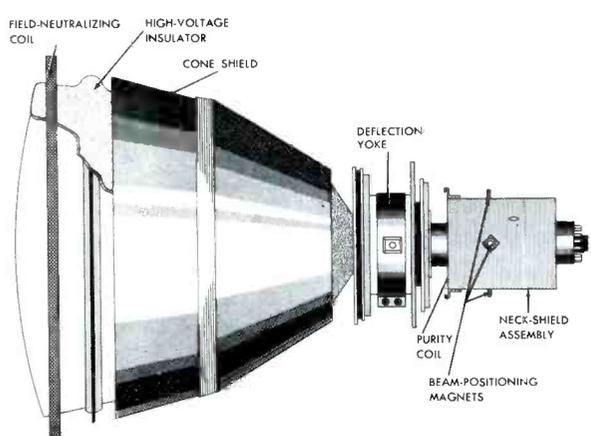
Auxiliary Components Used with a Three-Beam Color Picture Tube that Employs the Electrostatic Convergence Principle.
